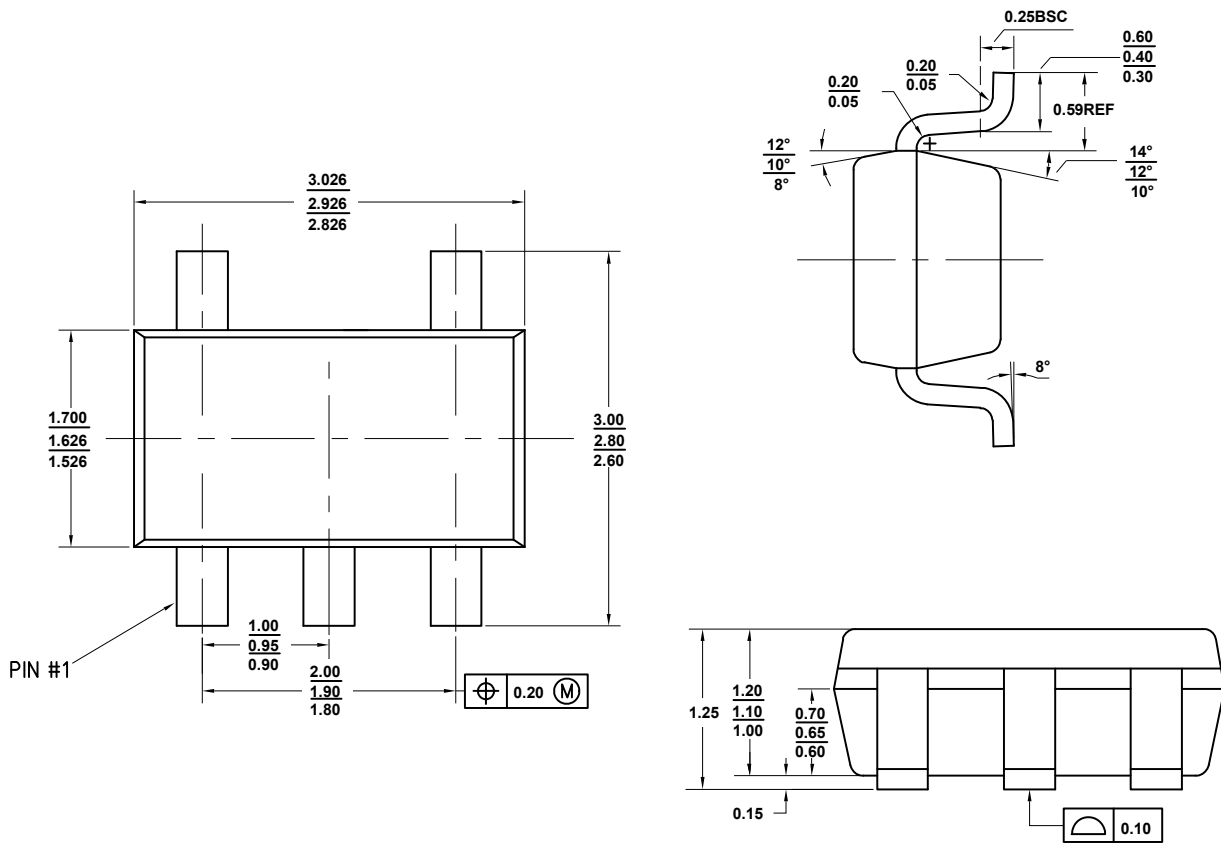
5-Lead SOT23 Package Dimensions shown in millimeters
